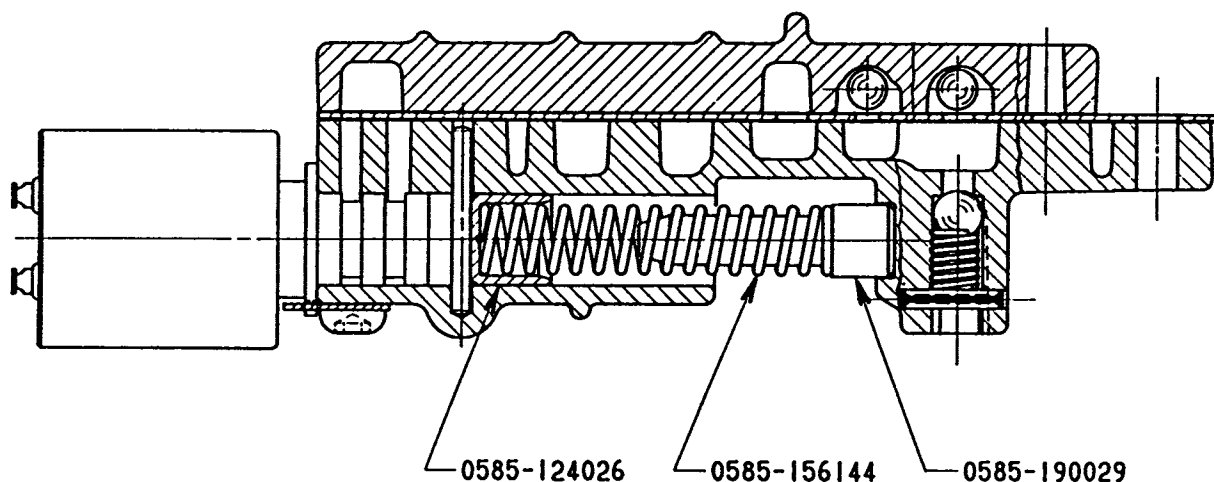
ASSEMBLY OF NEW S5 DAMPER COMPONENTS.
